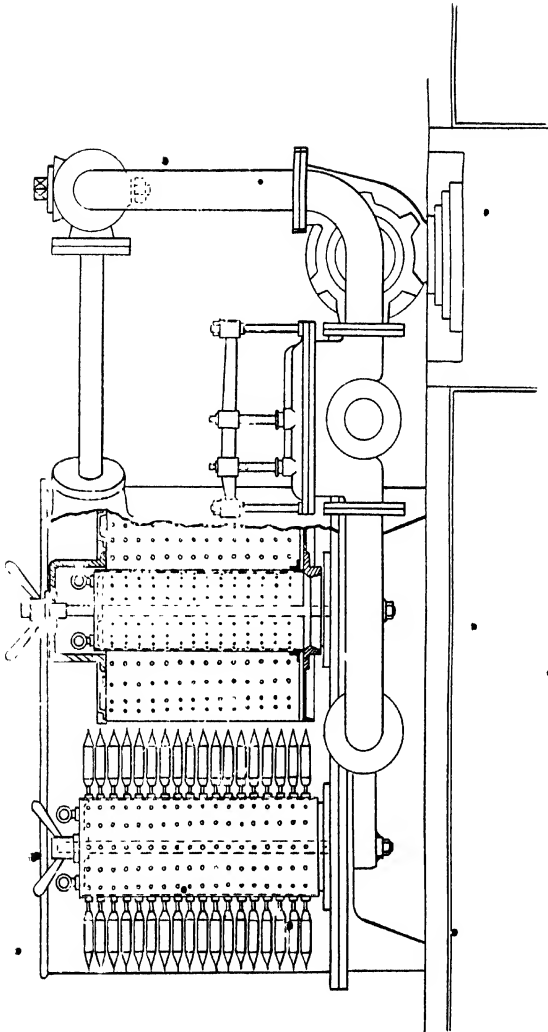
Pomnitz's Cop Dyeing Machine.
